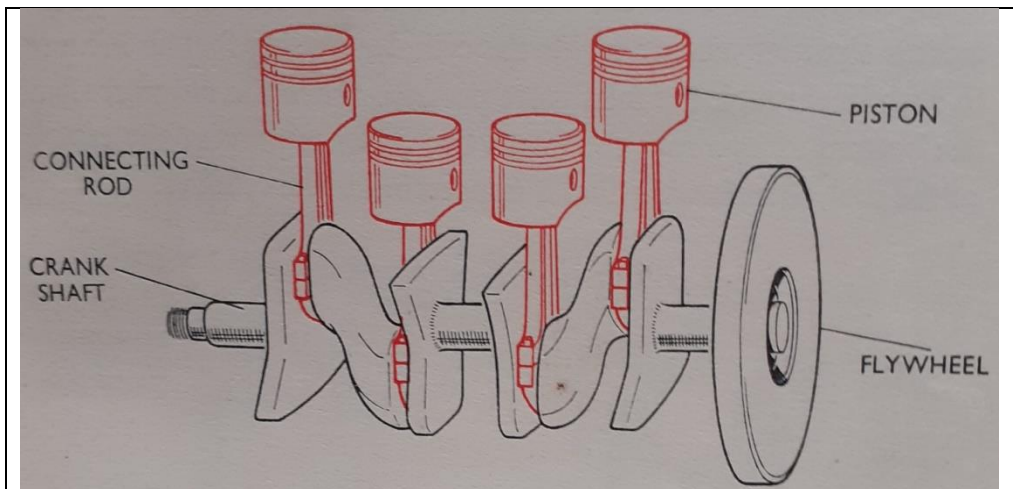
Arrangement of pistons on crankshaft (Source: Shippen and Turner, 1966)<sup>25</sup>
